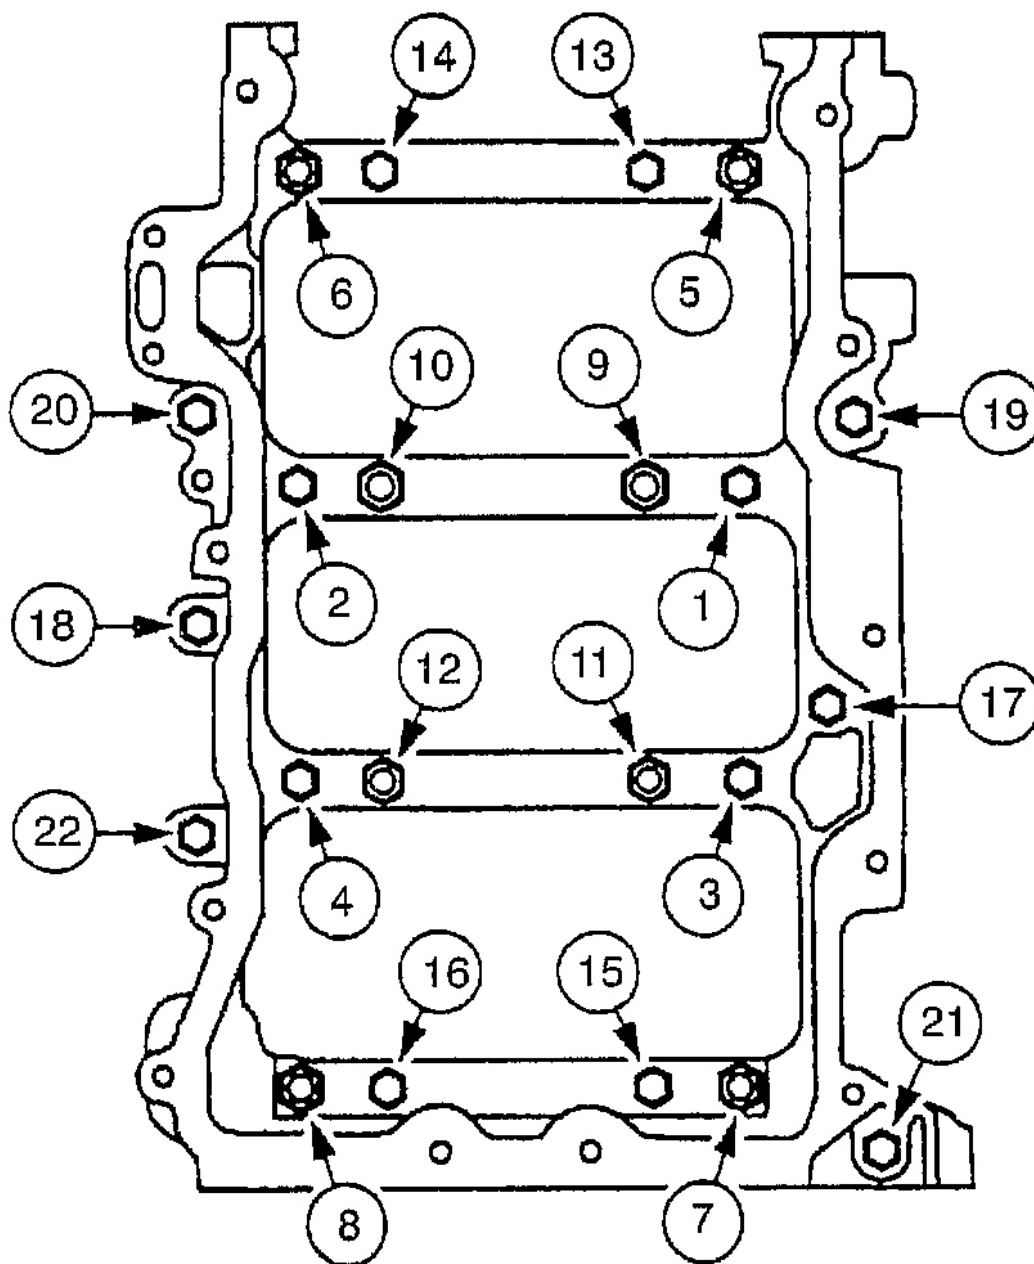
Lower Cylinder Block Bolt Tightening Sequence
